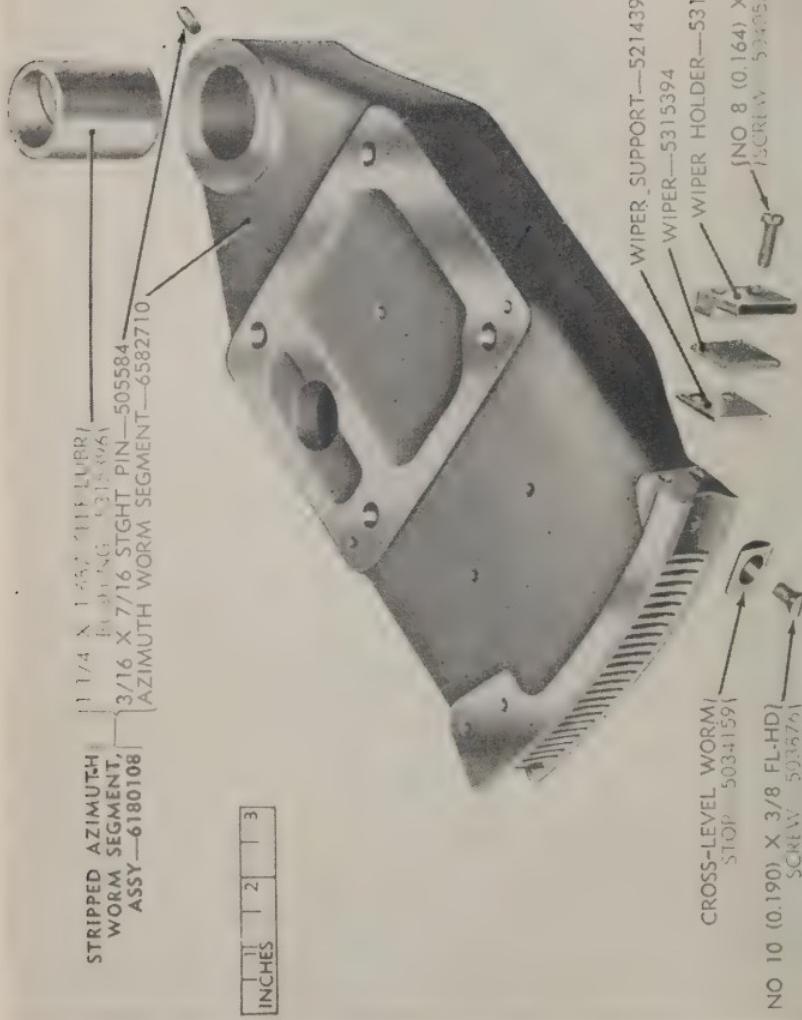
Telescopic mounts M_{22c} and M_{22d} —azimuth train segment assembly—exploded view.
